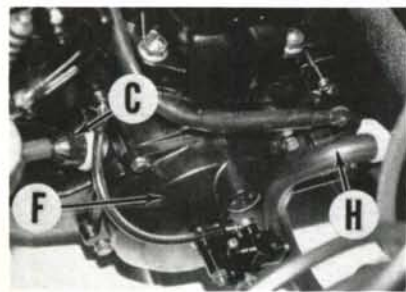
A supplemental water supply can be connected to fitting on exhaust manifold after removing cooling system supply hose (H) routed from jet pump. Engine flywheel is located behind flywheel cover (F). Unscrew cap (C) and withdraw wiring harness leading to electric box to expose terminal ends of wires leading to ignition exciter coil and charging system charge coil.
